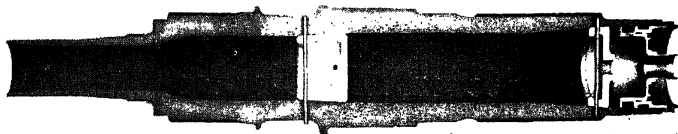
Section of Fiat A. 80R.C.41 airscrew shaft.
